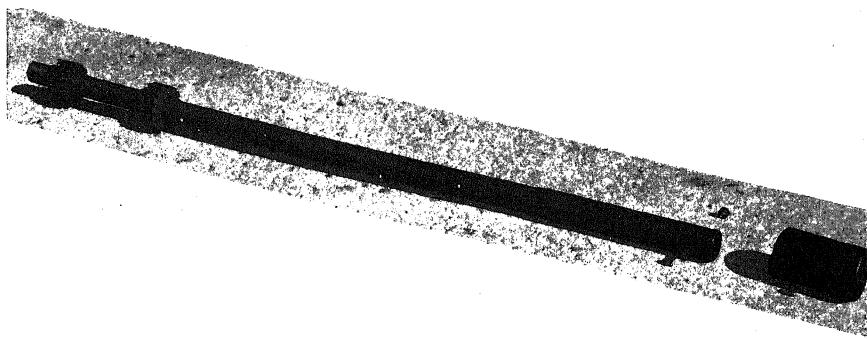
Pull rod assembly with rod, rod-to-cable coupling, lock bolt and screw, and serrated nuts.
